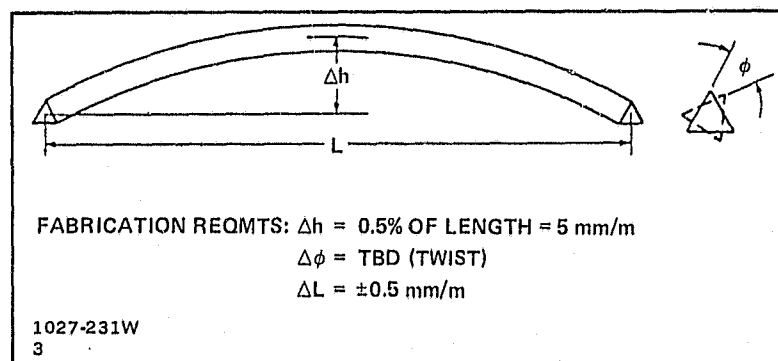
Manufacturing Tolerances — 40-Meter Beam Length
